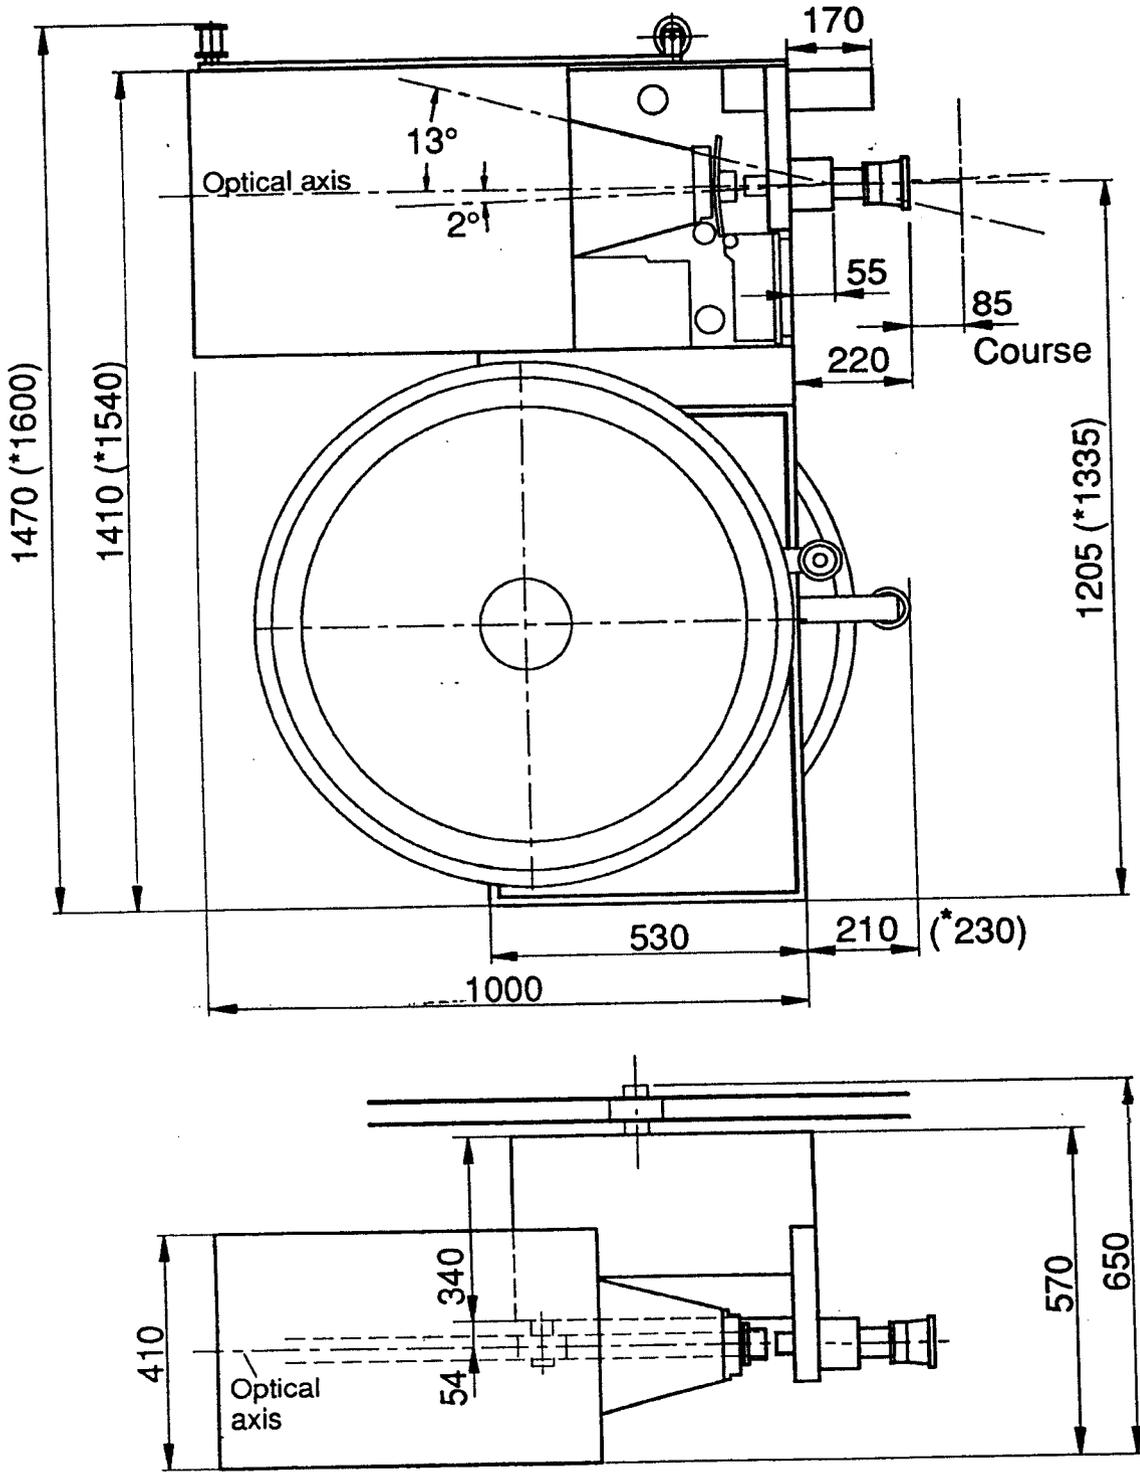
Vertical Friction Assembly, 4000 m / *5000 m - Dimensions in mm -
